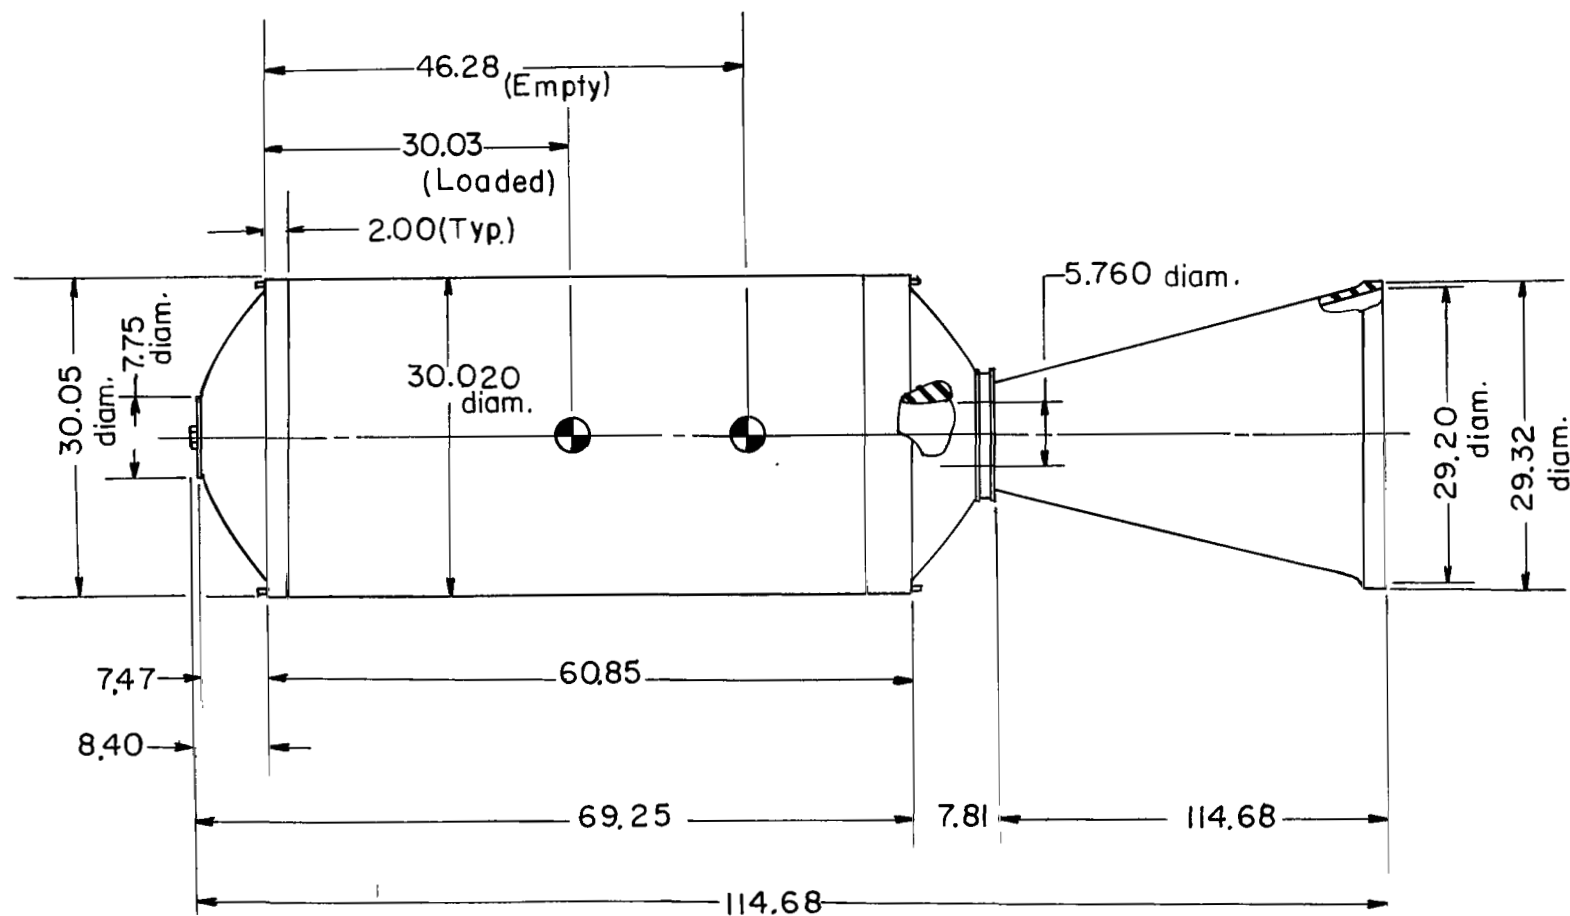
Second-stage rocket motor (Antares). All dimensions are in inches.
